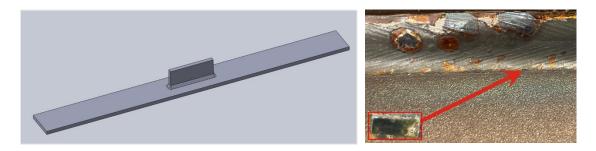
Left: Longitudinal gusset plate, and Right: enlargement of the notch placed in the weld toe region.
